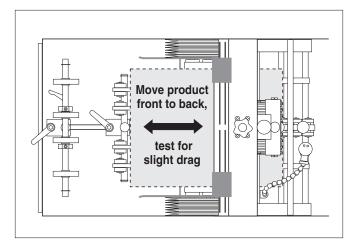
Using One-Piece Thickness of Product to Set Gap
